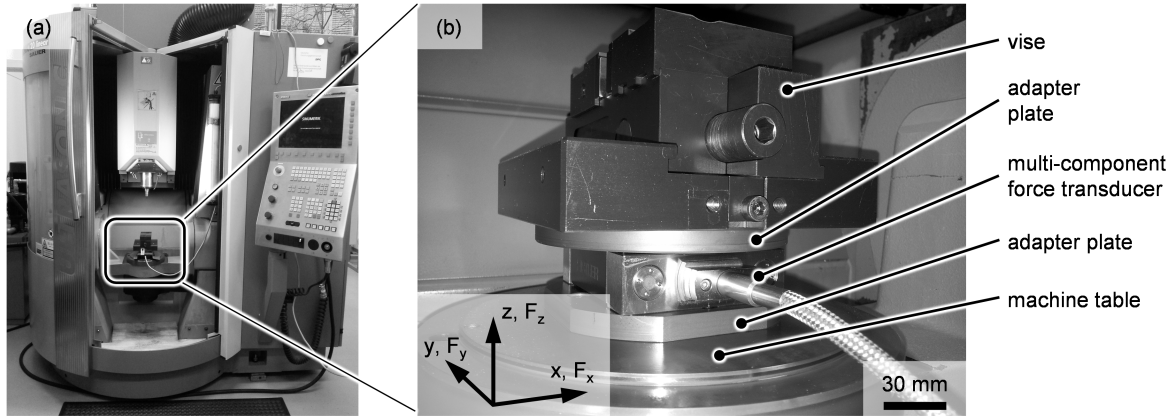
DMG Sauer Ultrasonic 20 linear machine tool (a) and setup for process force measurement (b).
